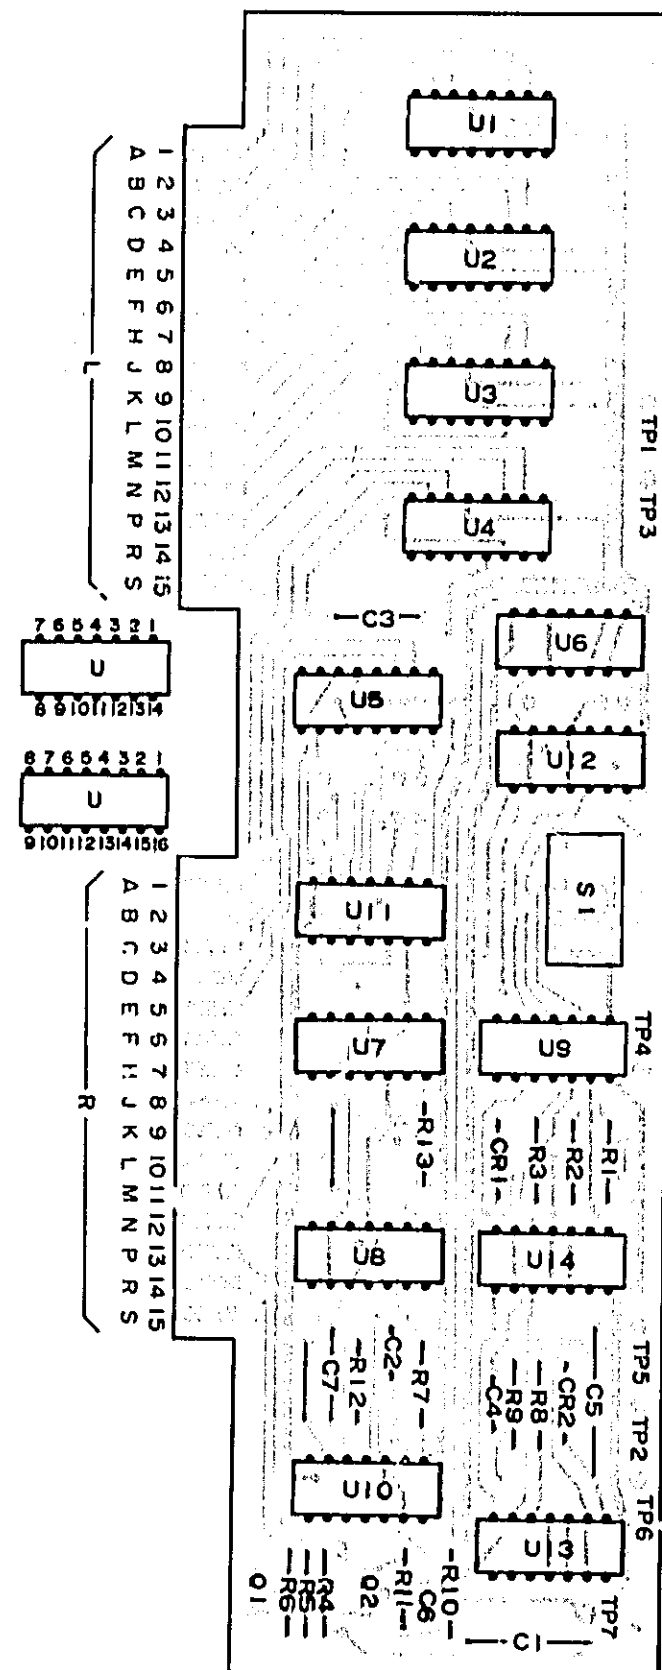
A25 Parameter Serial BCD Output Control Board Assembly Component Locations.
